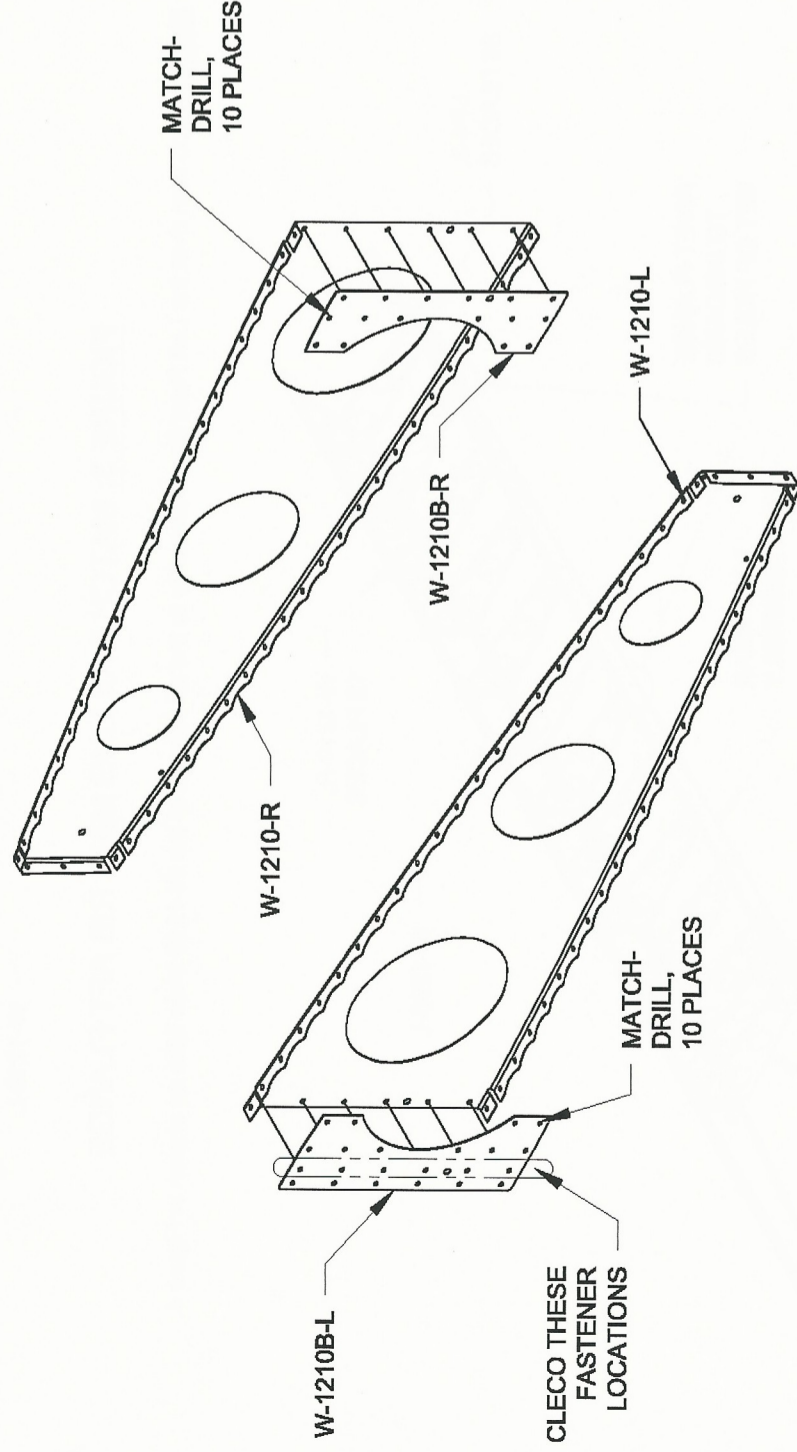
MATCH-DRILLING THE RIB DOUBLERS AND MAIN RIBS
